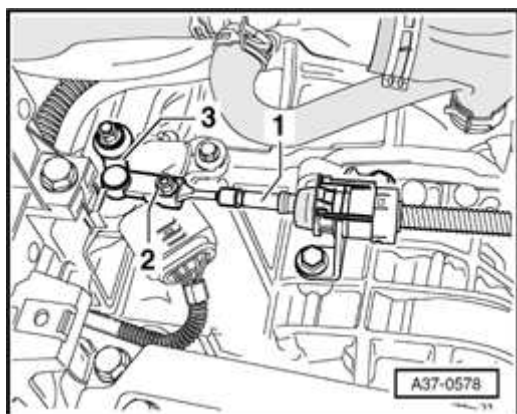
Identifying Selector Lever Cable At Transmission Side
